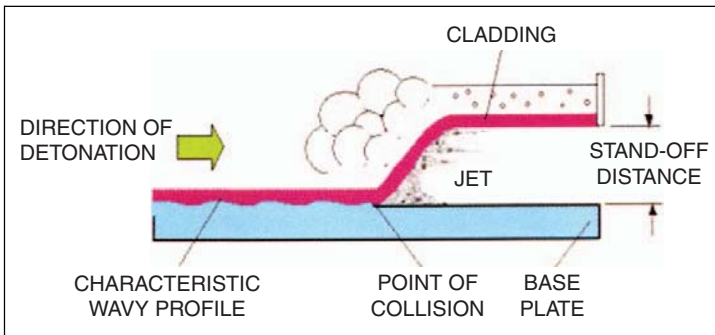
Schematic of the Explosion Welding Process
